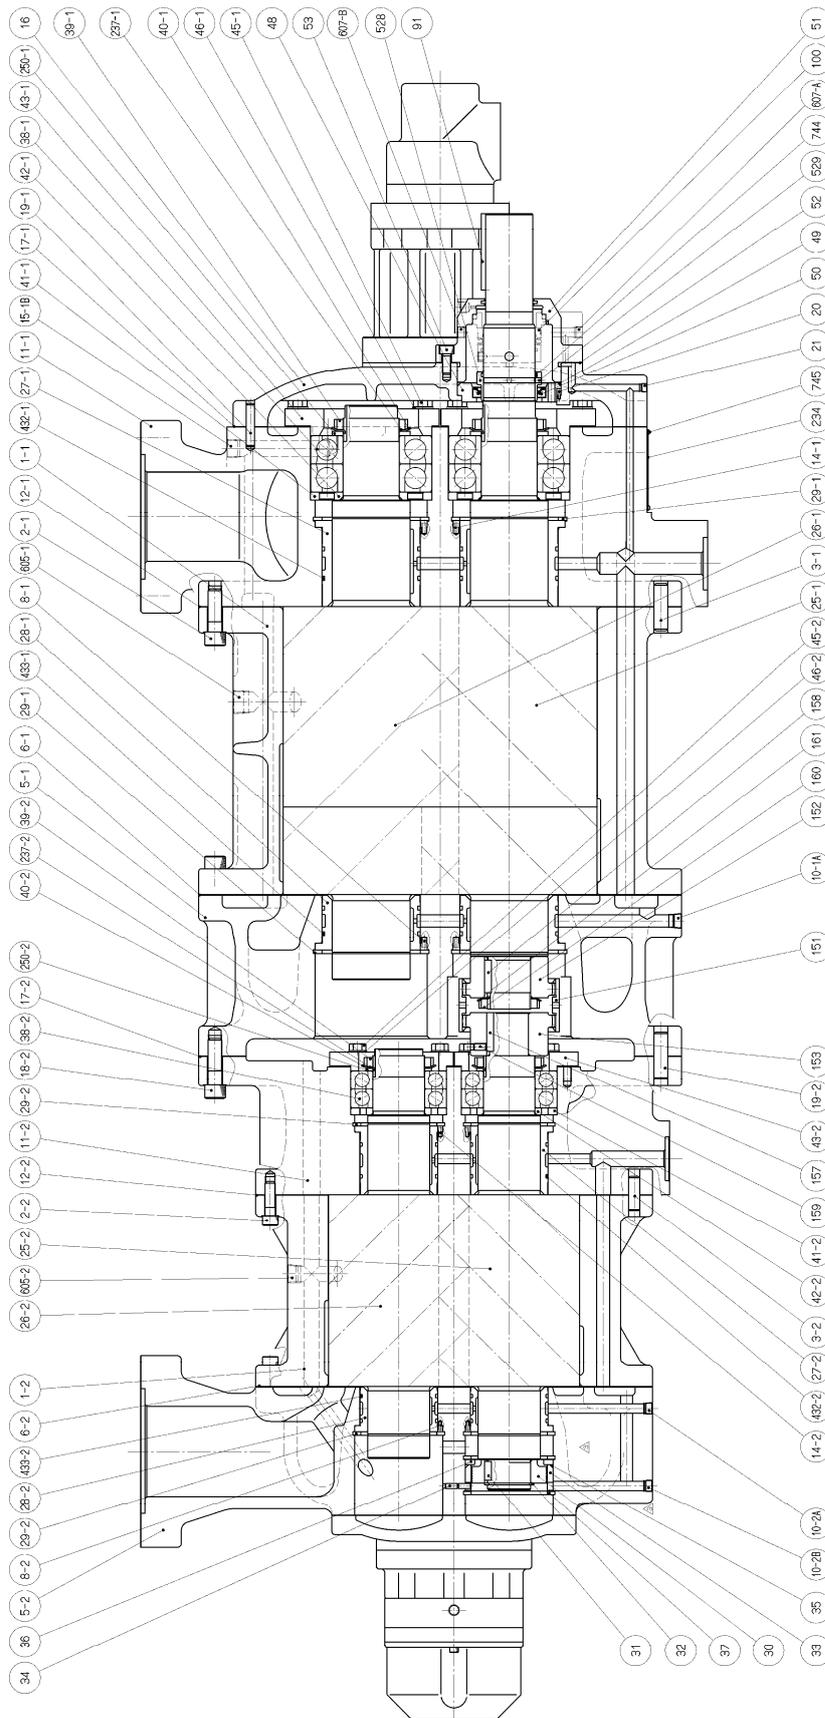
2016LMC Assembly Sectional View (Horizontal)
